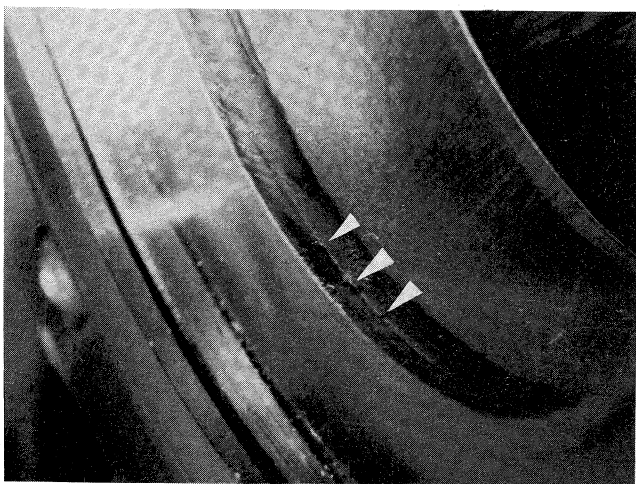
Photograph of the tuner flange. The oil-like liquid is seen at three points.
